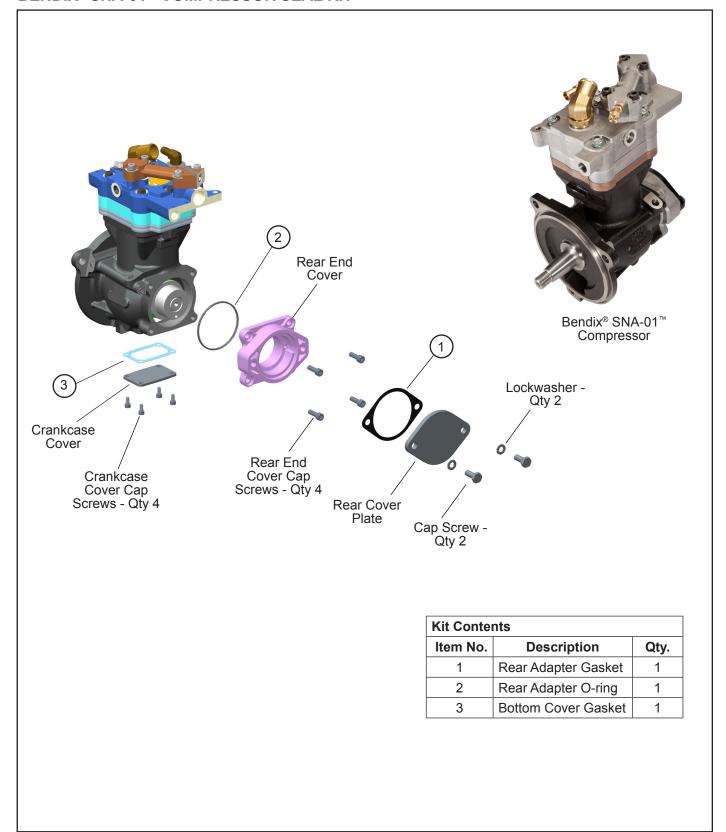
Bendix® SNA-01™ Compressor Seal Kit
